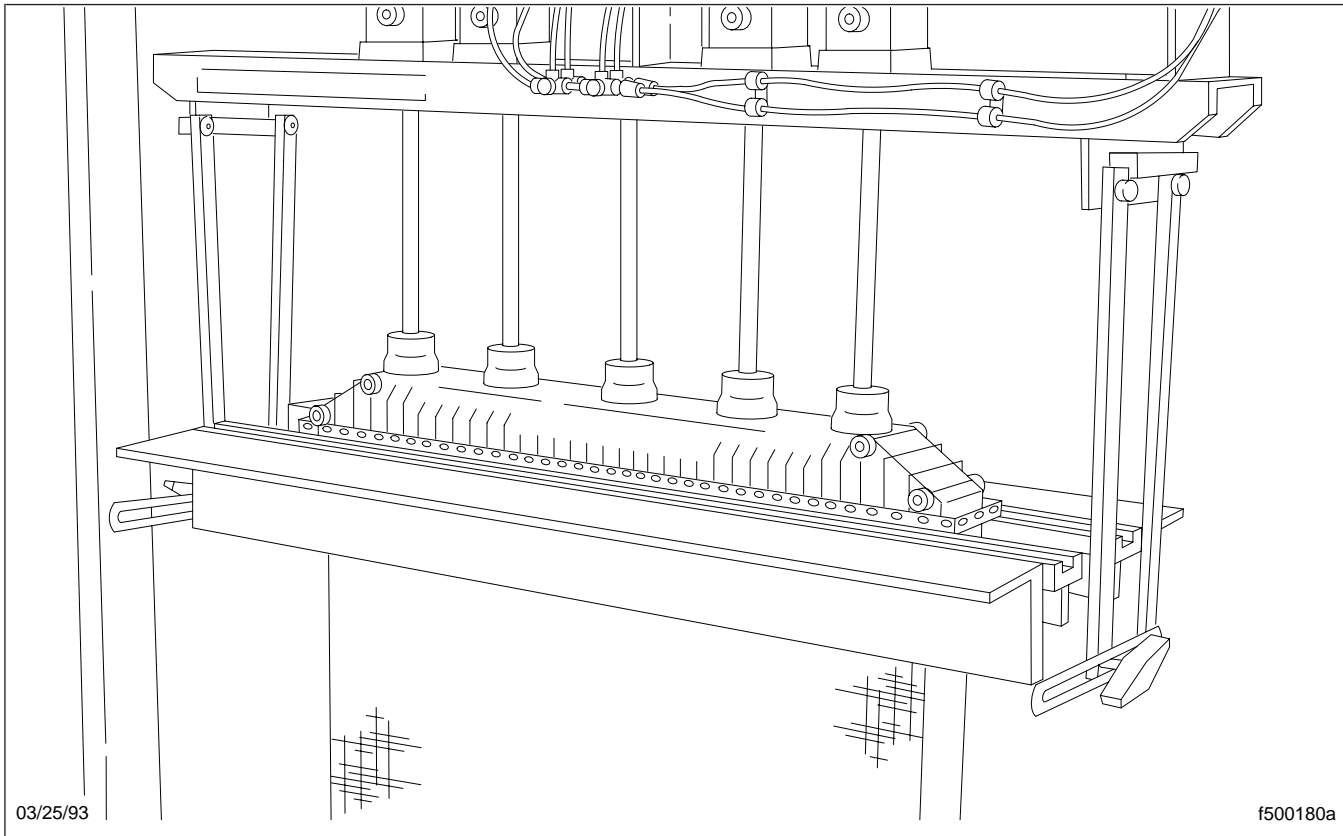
, Clamp the Radiator in the Disassembly/Assembly Fixture
